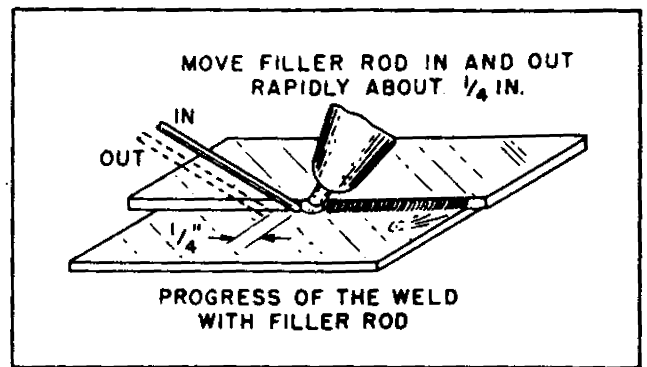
Progress of a Lap Weld with Filler Rod
